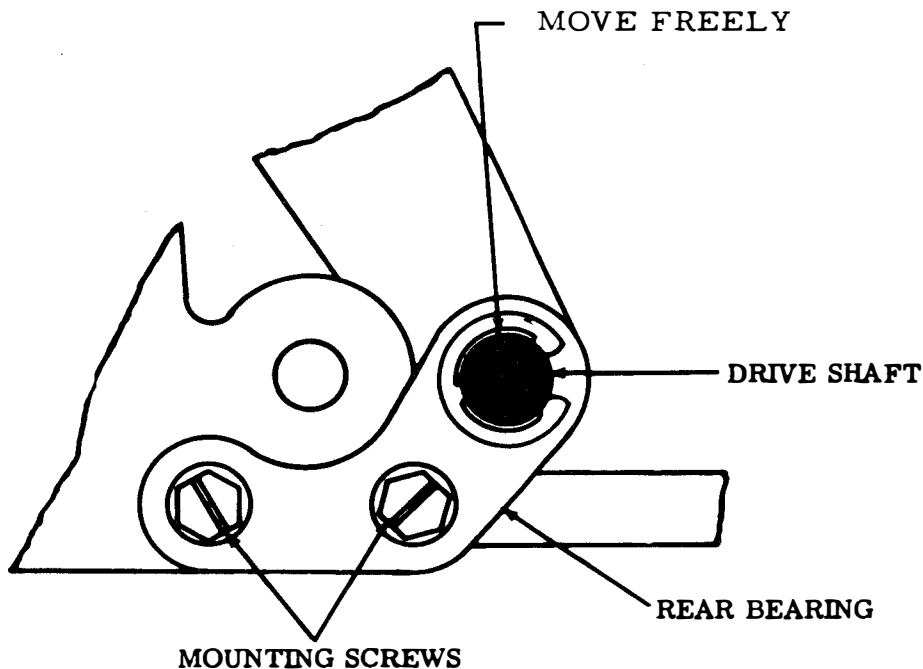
Drive Shaft Rear Bearing - Rear View
